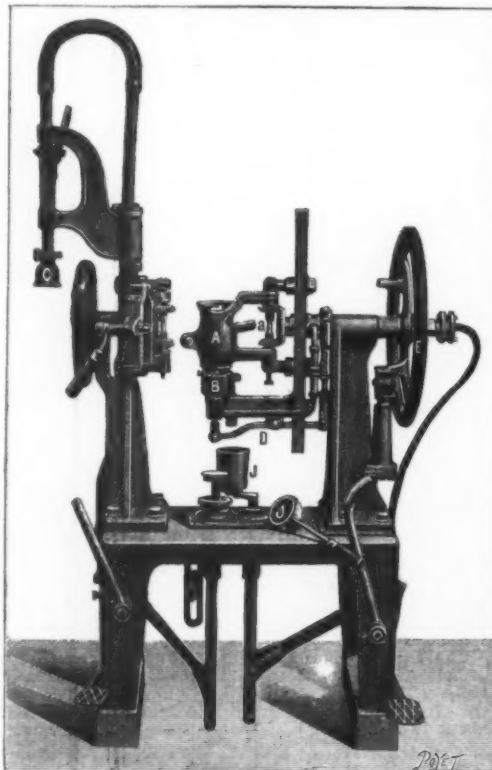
THE BOUCHER MACHINE FOR THE MANUFACTURE OF BOTTLES READY FOR THE RECEPTION OF THE MOLTEN GLASS.
